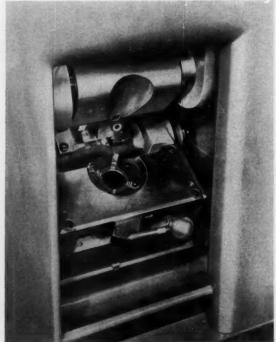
Close-up of tooling equipment in Fig. 1 for deburring and chamfering typical hypoid pinion
